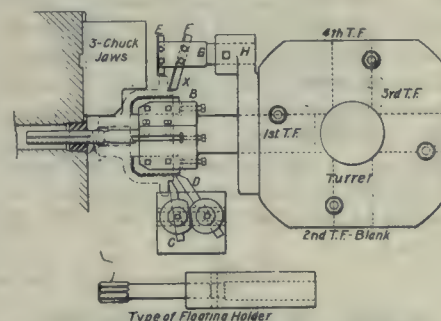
ARRANGEMENT OF TURRET AND TOOL POSTS FOR MACHINING GEAR CASE.
